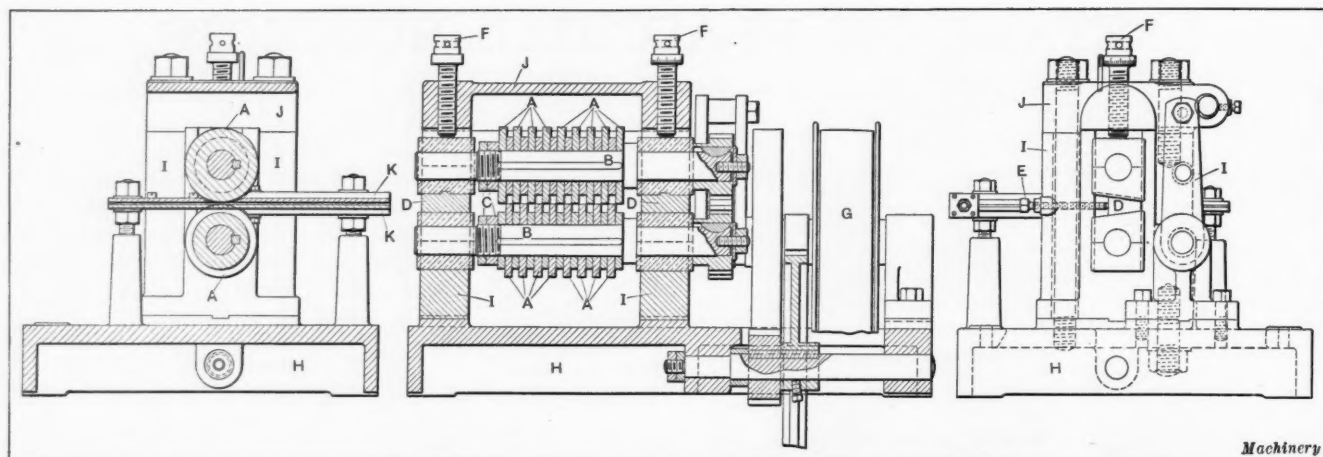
Machine for cutting up Sheet Stock 6 Inches Wide by 0.012 Inch Thick into Ribbon Stock 0.39 Inch Wide
